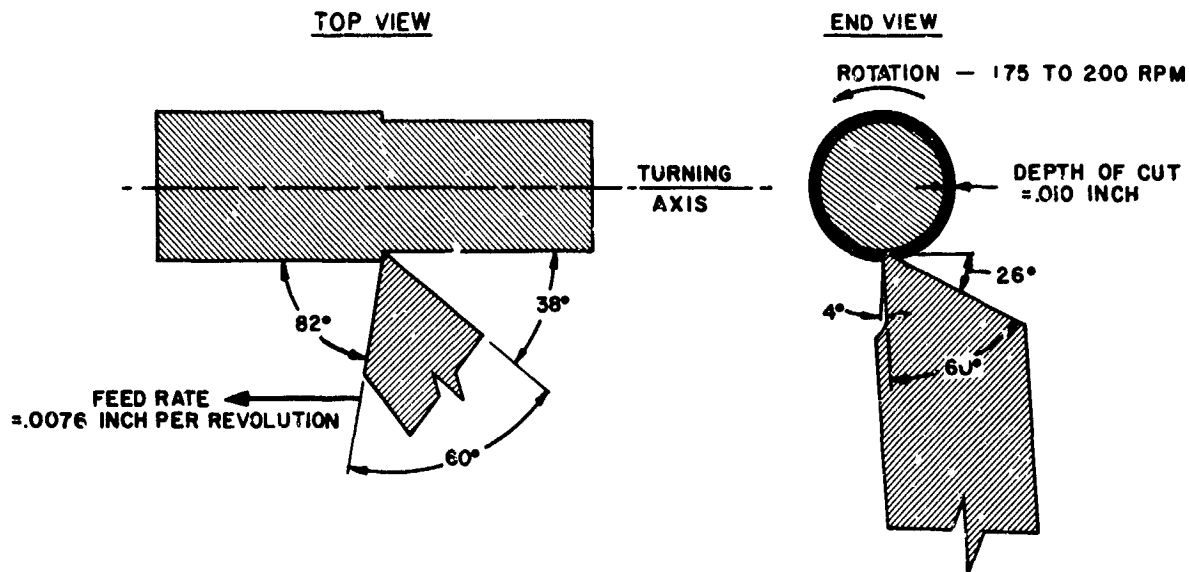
TOOL SETTING AND CLEARANCES USED IN MACHINABILITY TESTS;
